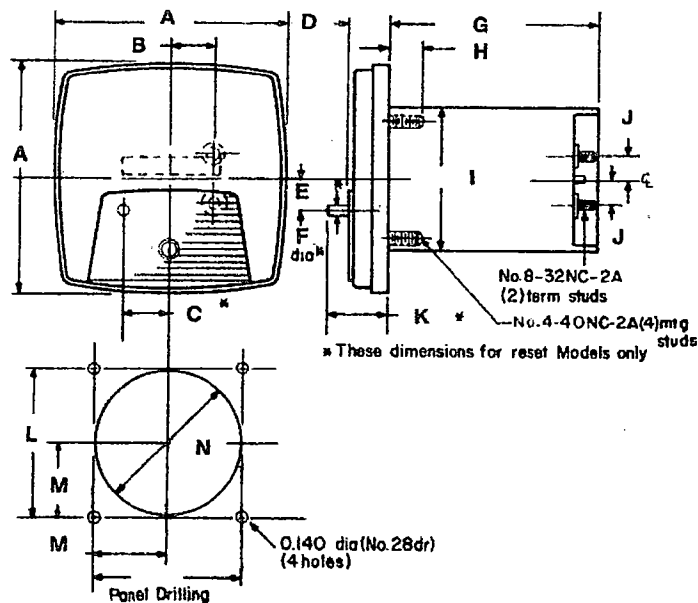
Outline Dimensions for 3½-inch Type 288 meters
